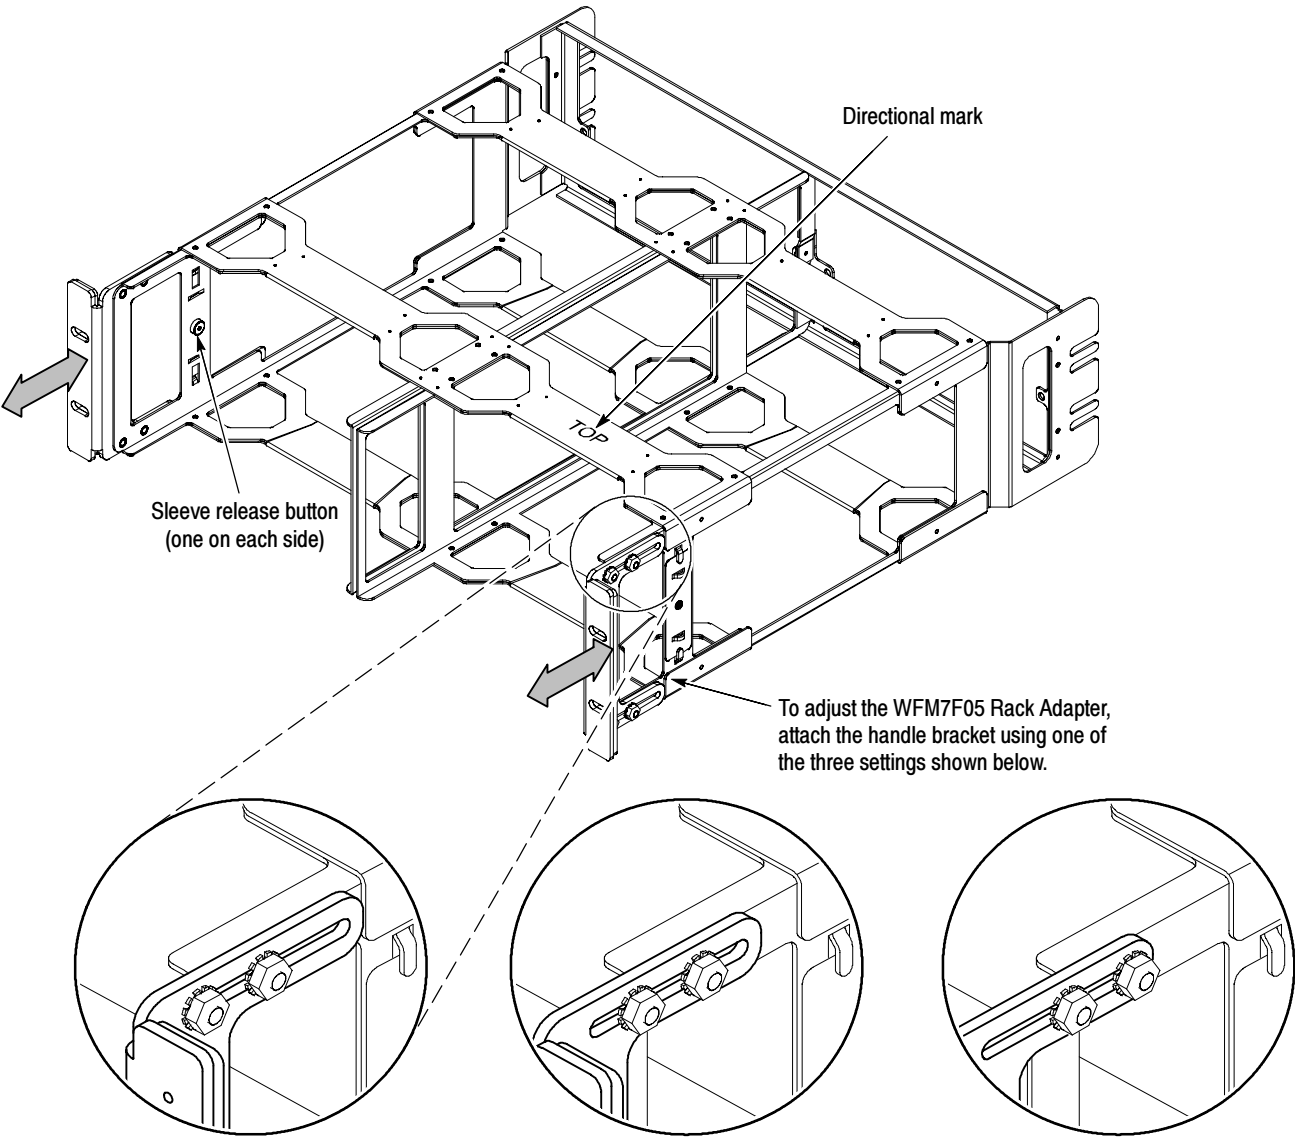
Adjusting the position of the WFM7F05 rack adapter handles
